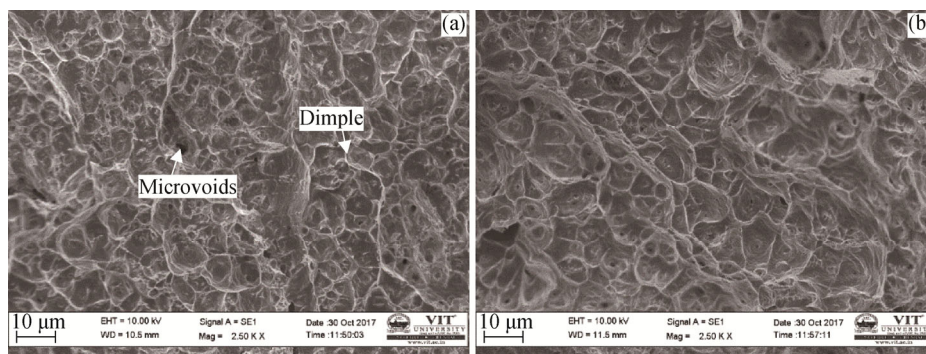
SEM fractographs of tensile failure specimens of (a) GTA weldment and (b) PCGTA weldment produced using ERNiCr-3 filler wire.
